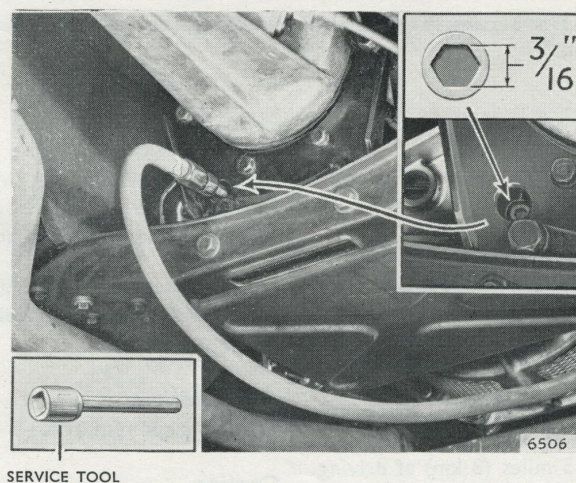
Transmission pressure take-off point and Service Tool used for plug removal
